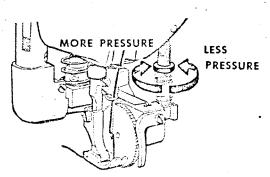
Regulating Pressure of Roller Presser on Machine 281-23
